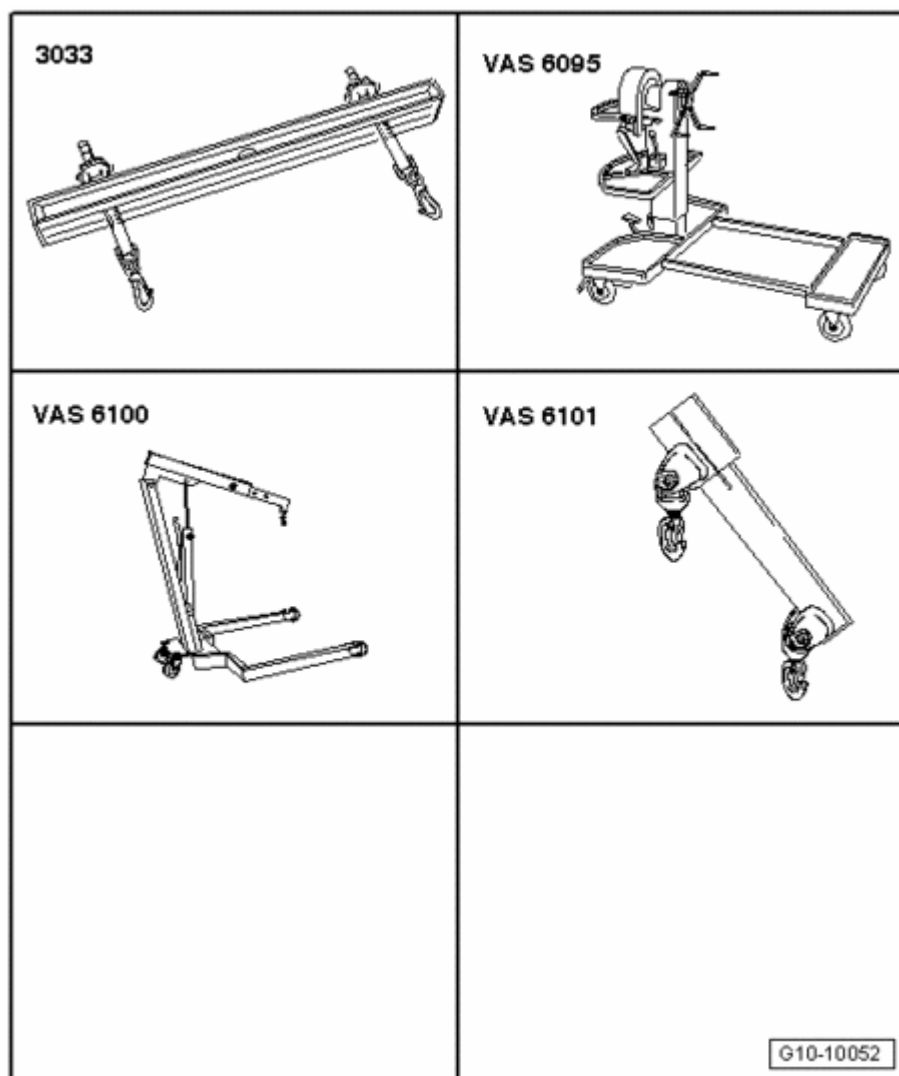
Identifying Special Tools - Engine, Securing To Assembly Stand
